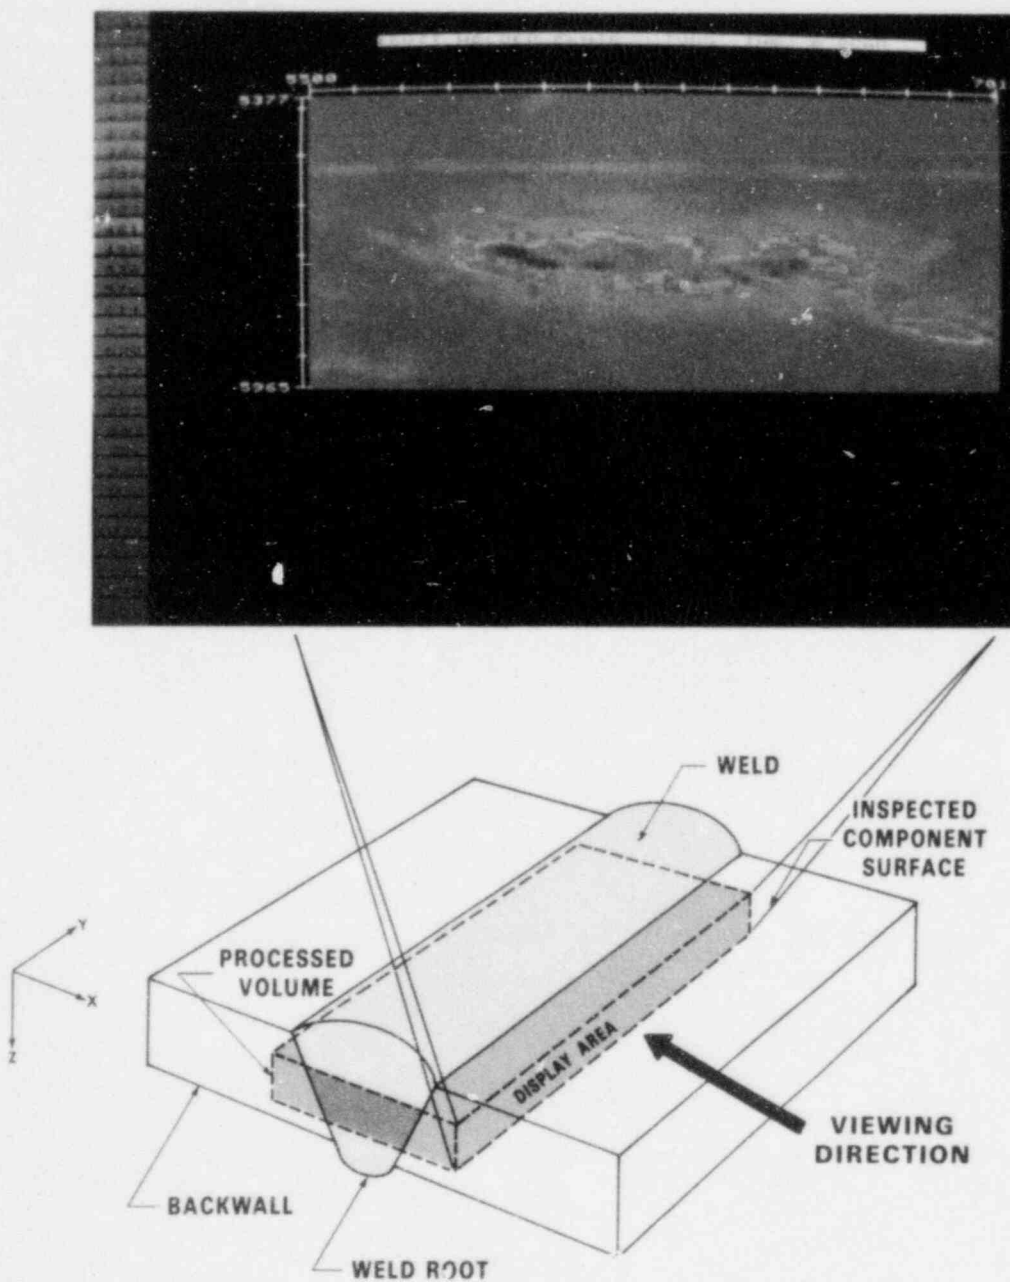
BUTT-WELDED CARBON STEEL PLATE SPECIMEN - HEAT-AFFECTED ZONE-TO-BASE METAL CRACKING (B-Scan View Parallel to Weld)
